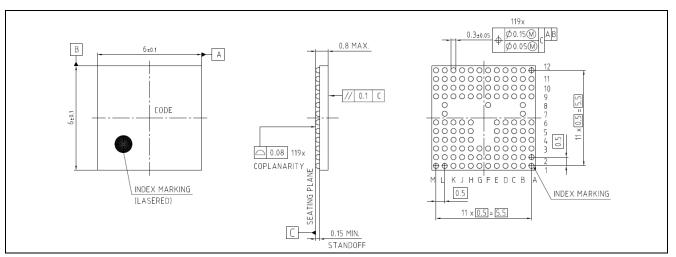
Dimension of eWLB Package PG-WFWLB-119-1 for BGT70 (left: top view; center: side view; right: bottom view)
